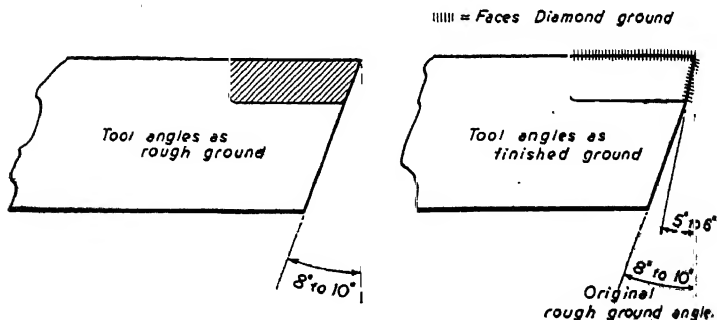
Method of grinding tungsten-carbide-tipped tools.
